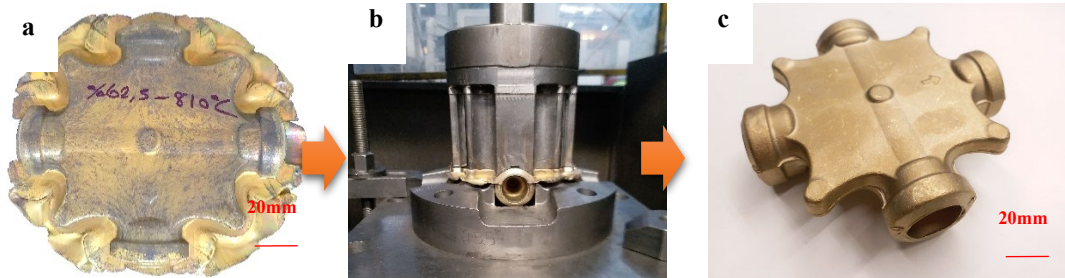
a) Forged CW511L sample with burrs, b) burr cutting process c) final shape.
